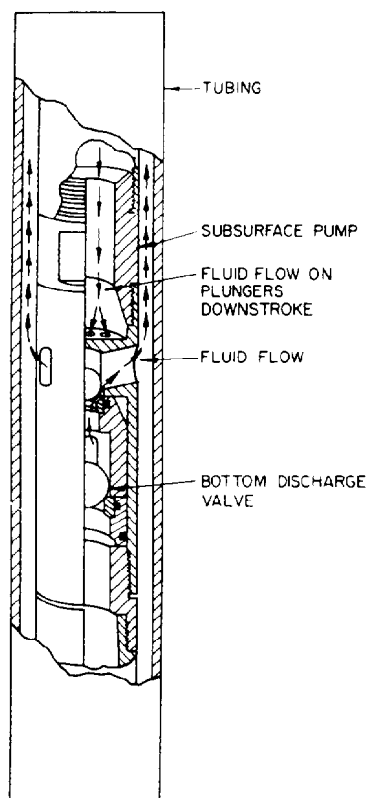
Bottom-discharge valve for use with bottom-seating stationary-barrel rod pumps. This valve is attached to the bottom of a pump and through it part of the well fluid is diverted up the side of the pump to help dislodge sand that may have settled between the pump and the tubing.
